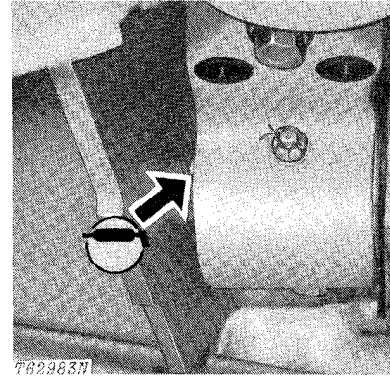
Rear Axle Pivot Pin (Front) (1 Point)
